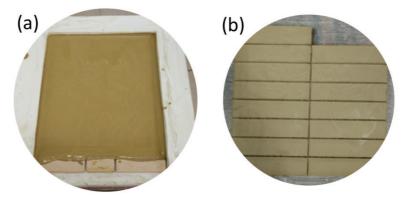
Ceramic pieces produced from ball clay without any cracks; (a) casting on Plaster of Paris mold and (b) cut into pieces for testing
